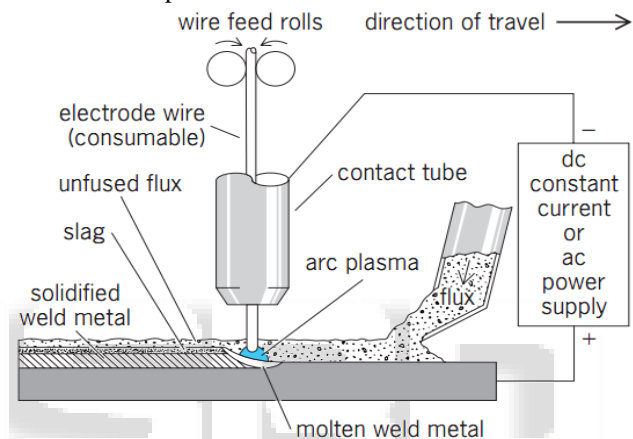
Submerged Arc Welding process. [Ref.8]
